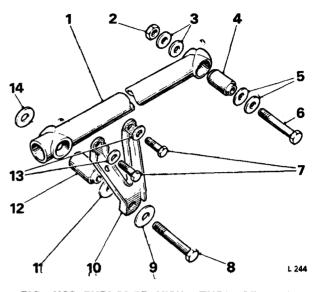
EXPLODED VIEW-TUBULAR LINKS
